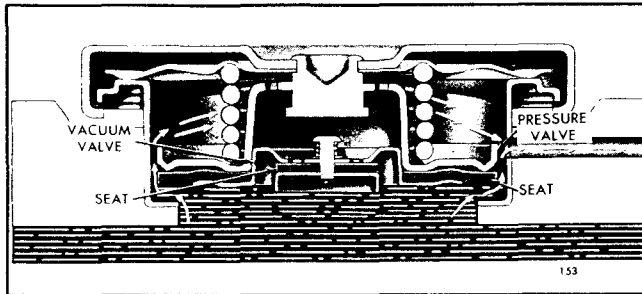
Pressure Control Cap (Pressure Valve Open)
